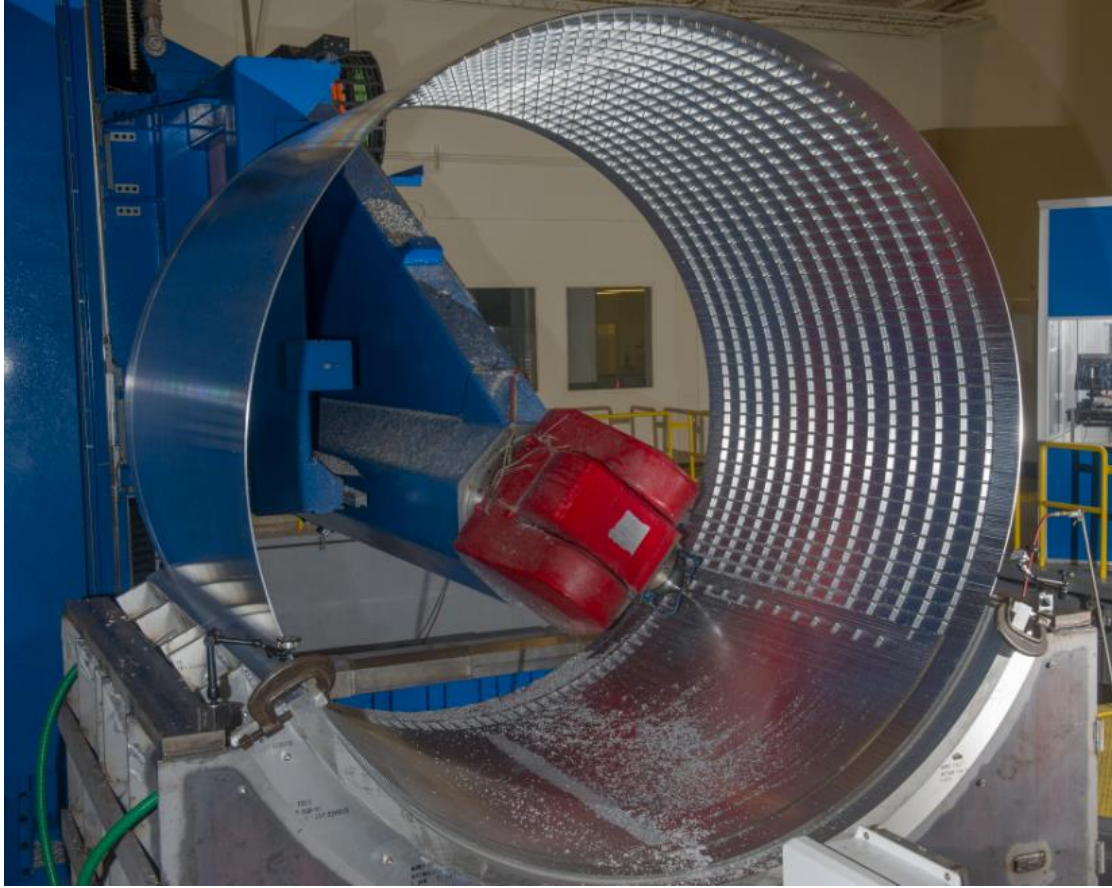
STA8.1 being machined on the 7-axis milling machine.
